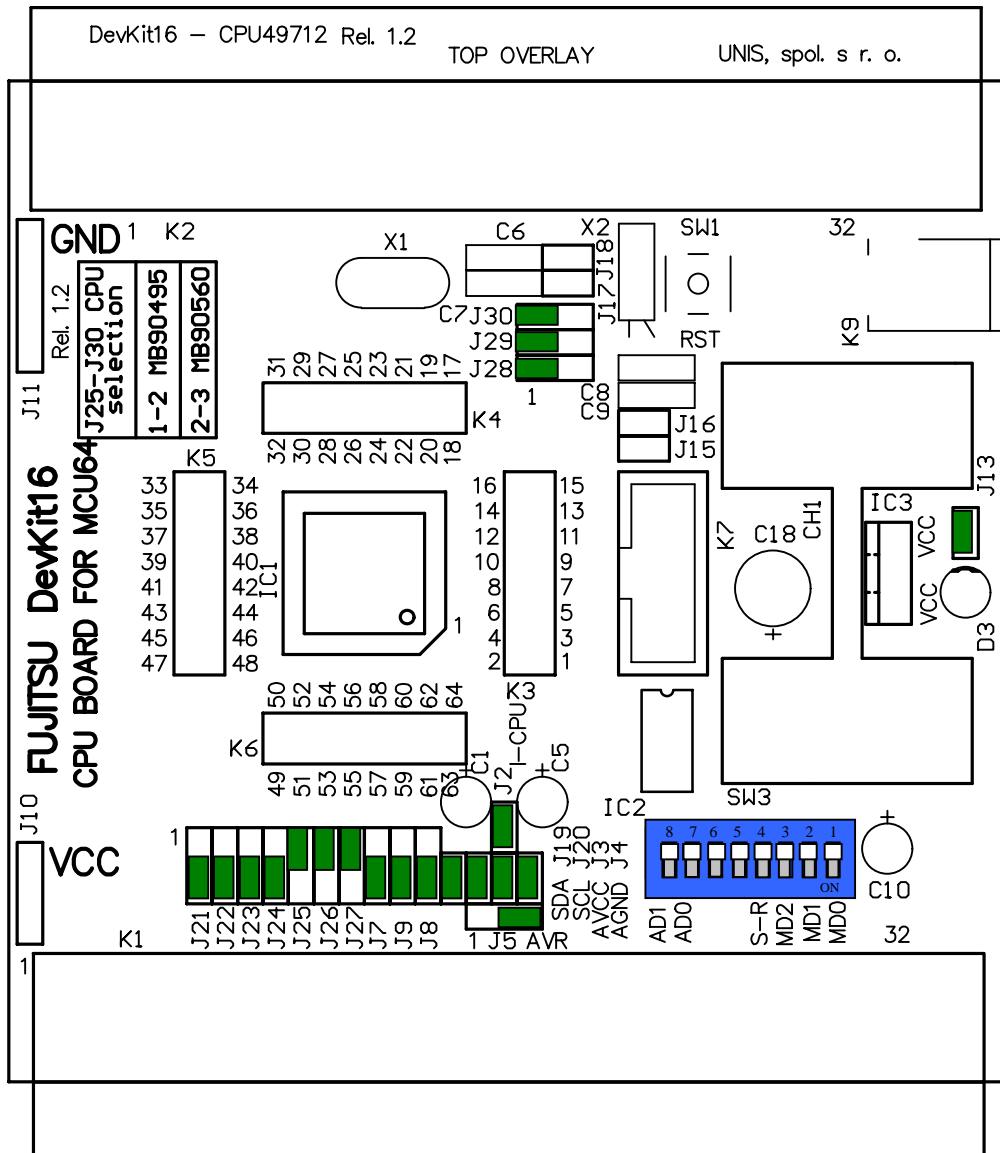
CPU board layout and default jumper settings for MBF497 and external bus mode
